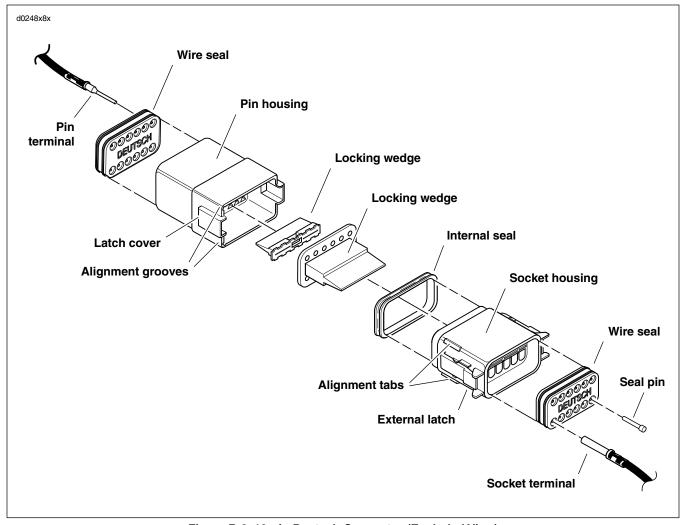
12-pin Deutsch Connector (Exploded View)
